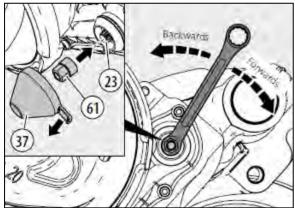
REMOVE CAP, INSERT NEW BRAKE PADS, SET THE STARTING GAP
